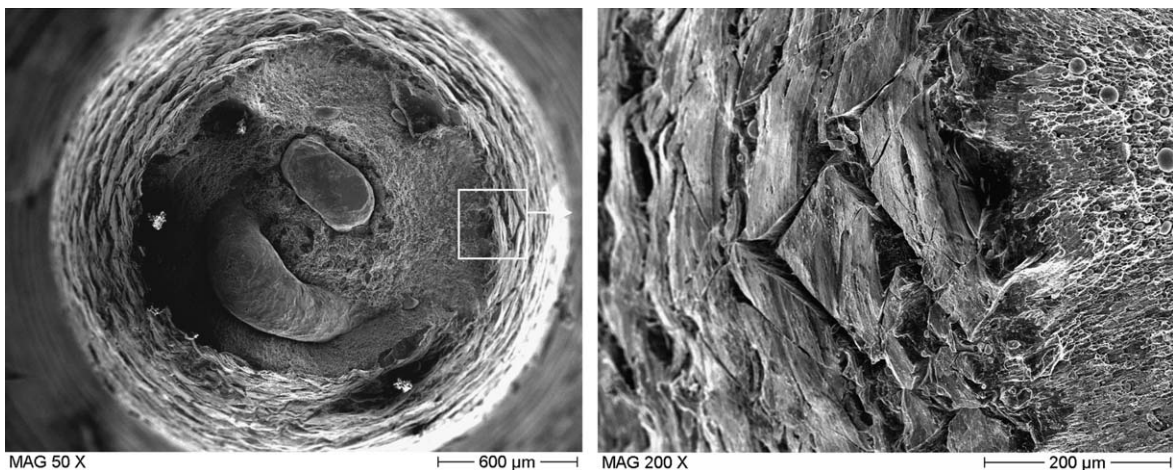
Fracture surface overview of A316L sample 3D irradiated to 1.53 dpa and tested in Pb–Bi.
